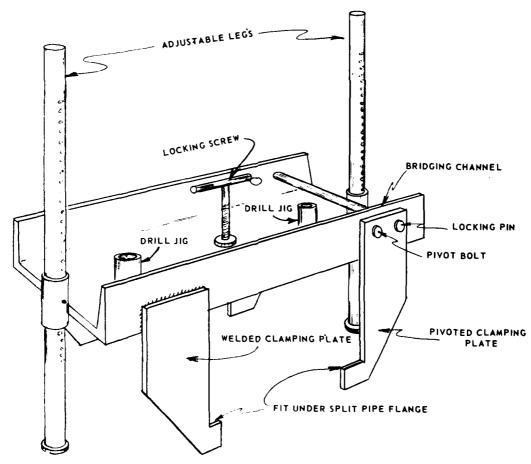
Drill jig for locating U-bolt anchor holes.
